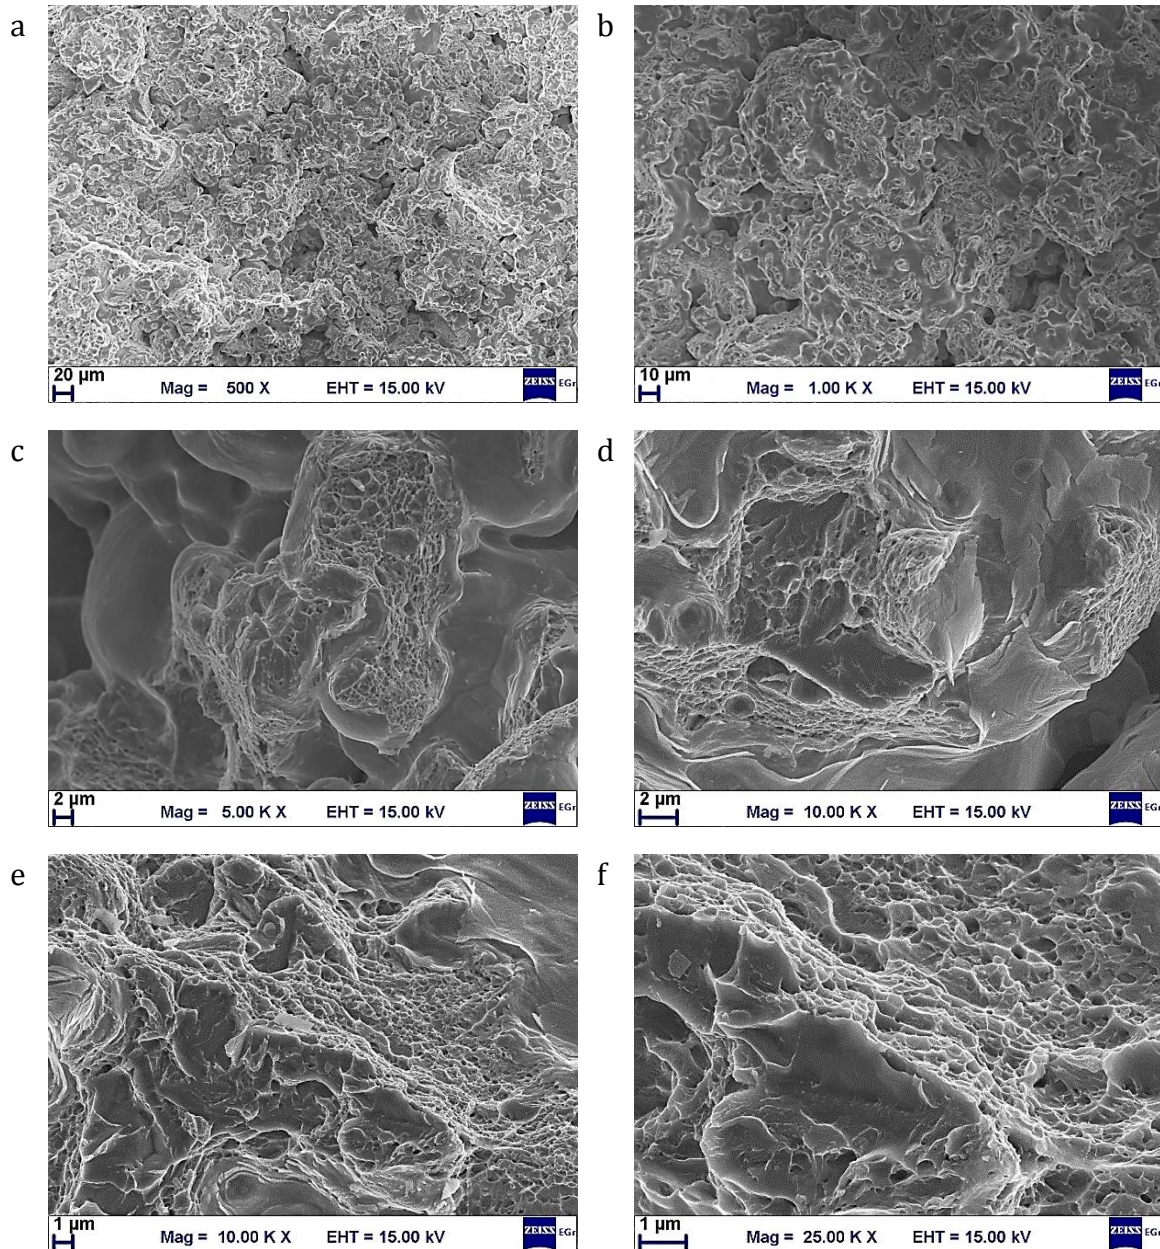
Fracture surface of DHP-T300 sample showing the general appearance of the fracture surface (a, b) and (c-f) shows different sites of inter- and transparticle dimple ductile fracture together with cleavage fracture.
